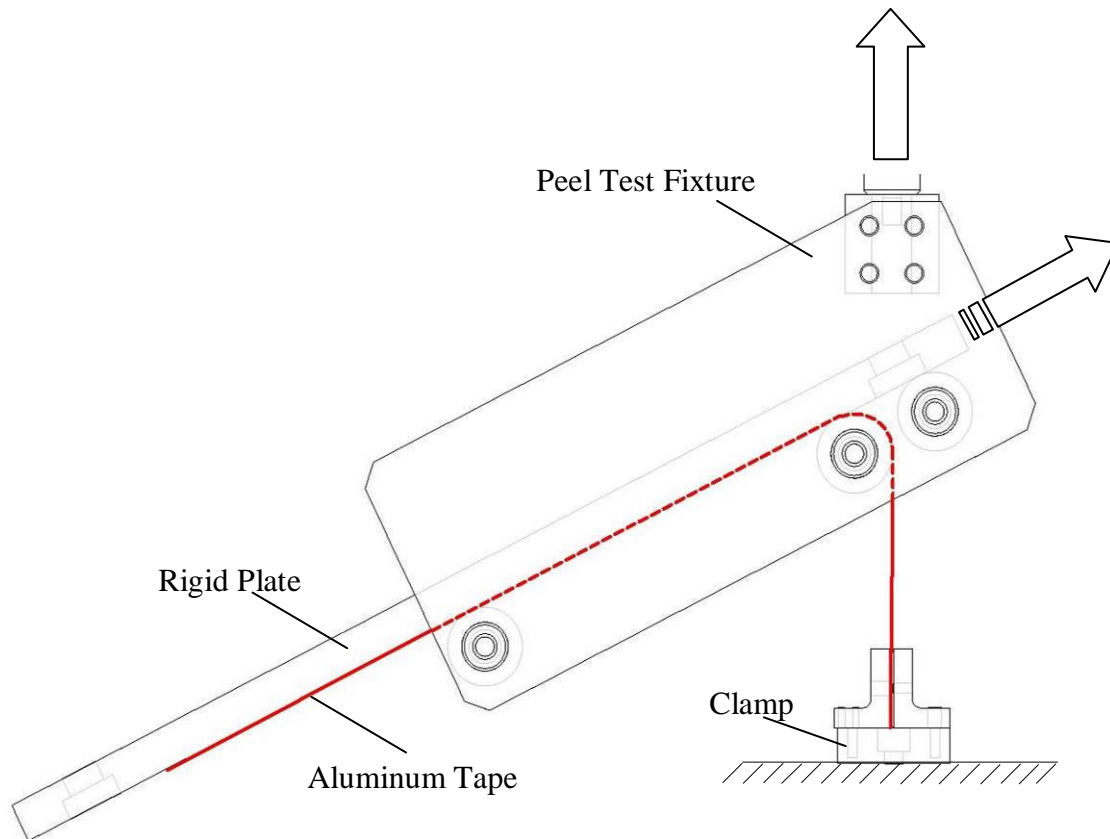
Apparatus for performing peel tests on consolidated specimens.
